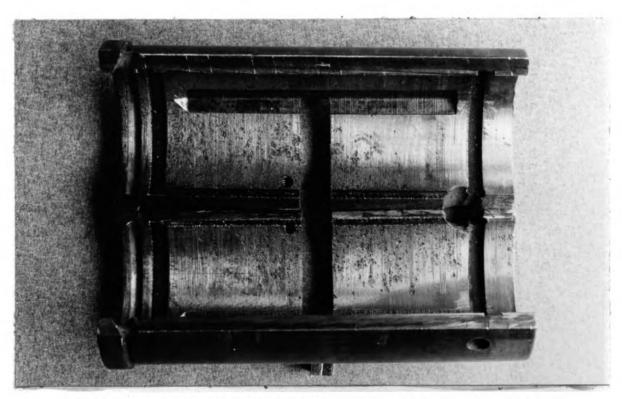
Bronze Bearing Showing Effect of Electrical Pitting.
